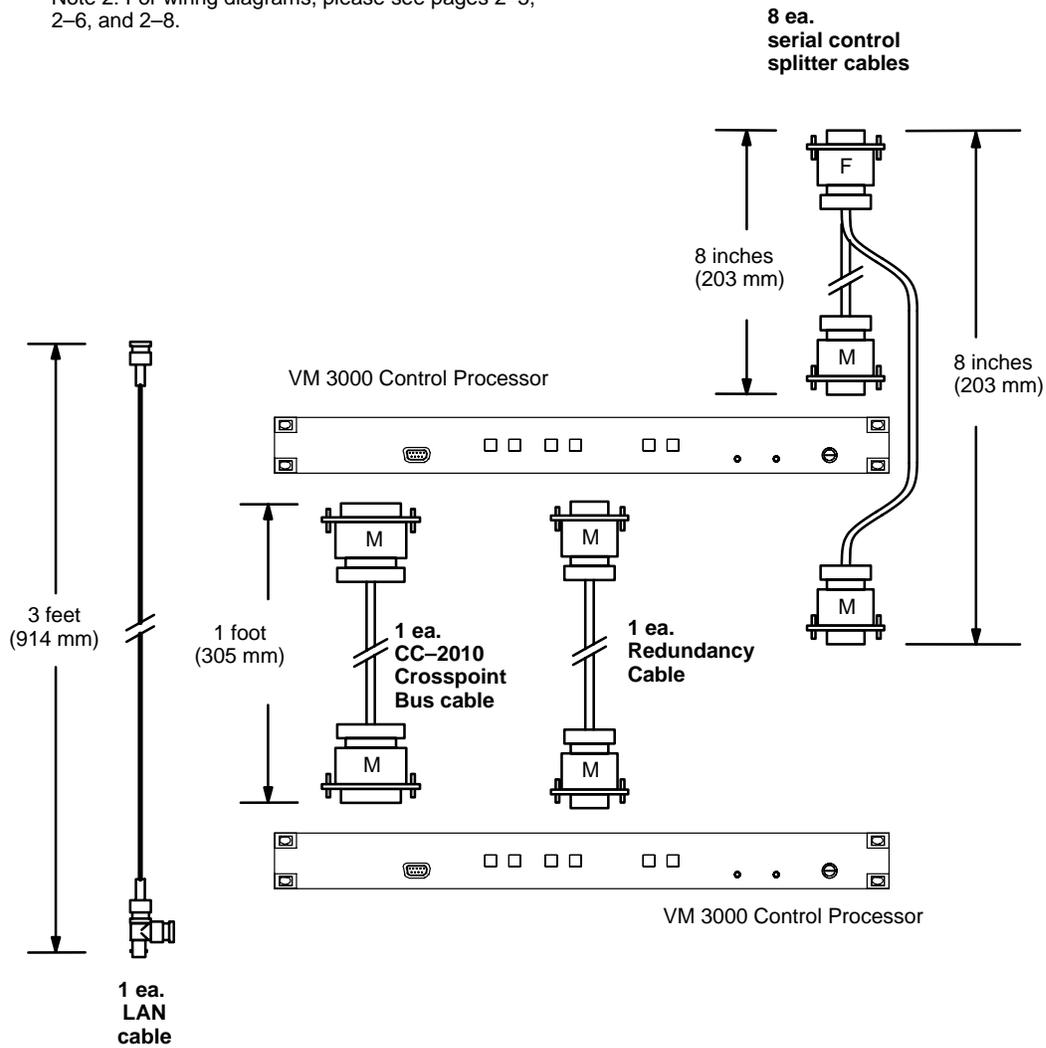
VM 3000 redundancy kit cables. Kit part no. 44-045838-001.
